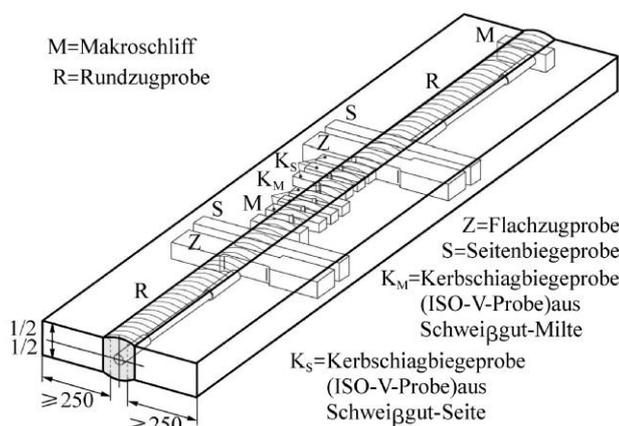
Test specimen and test coupon for electrogas welding for the testing of welding consumables^[6]
